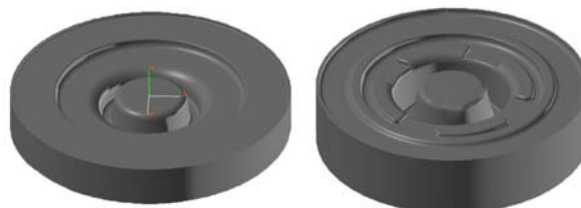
Rendered images of CAD models of the lower (left) and upper (right) mold cavities for final forging die
